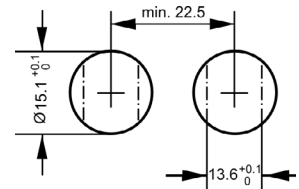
Panel cut out in cabinet for ID 13065; numbers refer to mm
